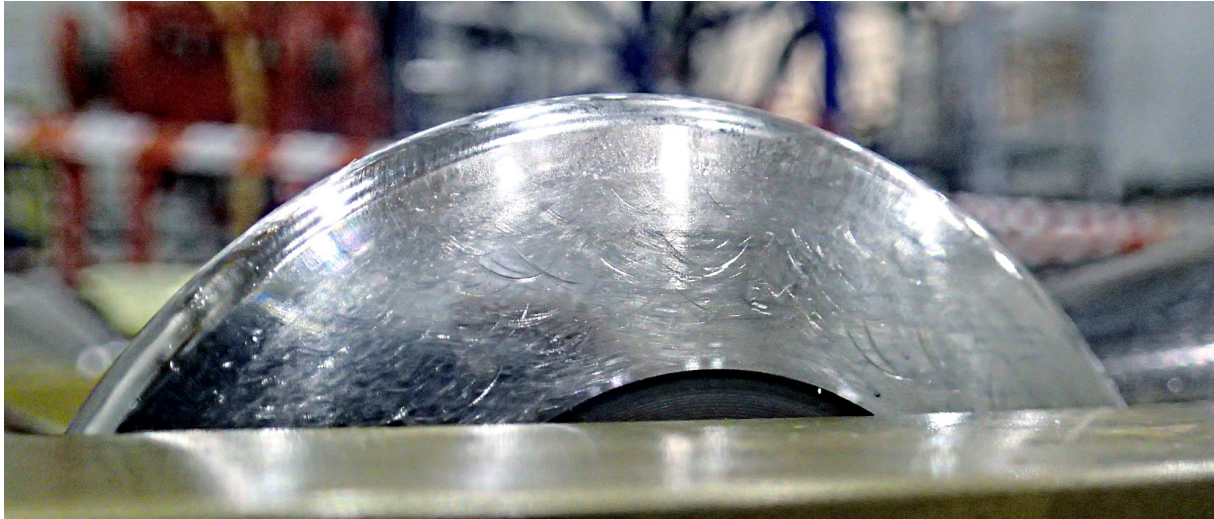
Damaged top drive bearing with arc-shaped scratches on the roller end.
